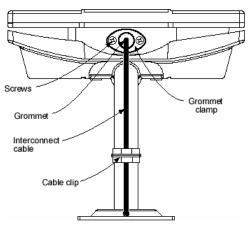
Interconnect Cable Installation to Subscriber Unit -- Bottom View
